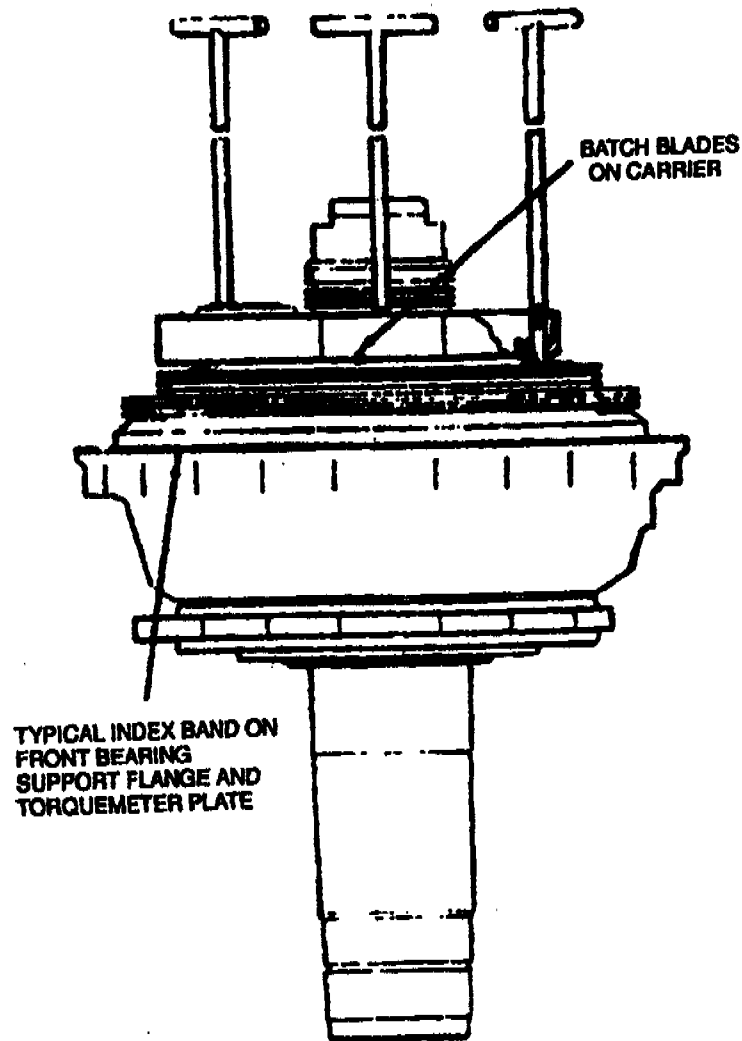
Removal of Propeller Shaft Carrier (T53-L-15).
